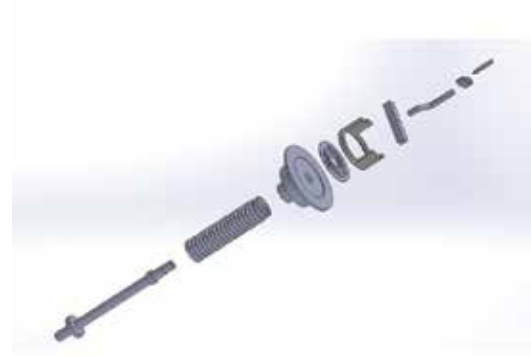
An Exploded view of the Self-Regulation Mechanism of JT Cooler
